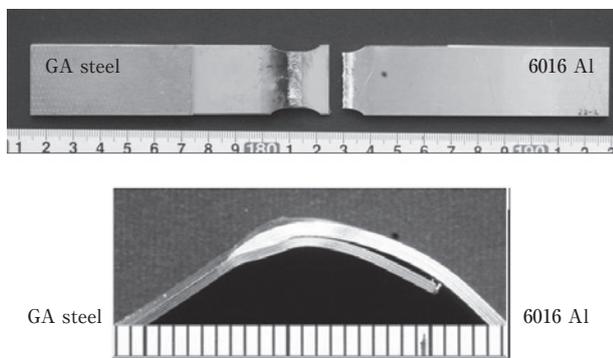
MIG welding between aluminum alloy and galvanized steel sheets.
